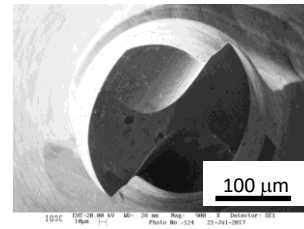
Scanning electron microscope image of the micro endmill cutter used to machine the stepwise-phase Fresnel in PMMA and RSA6061; top view, Endmill cutter diameter = 0.3 mm.
